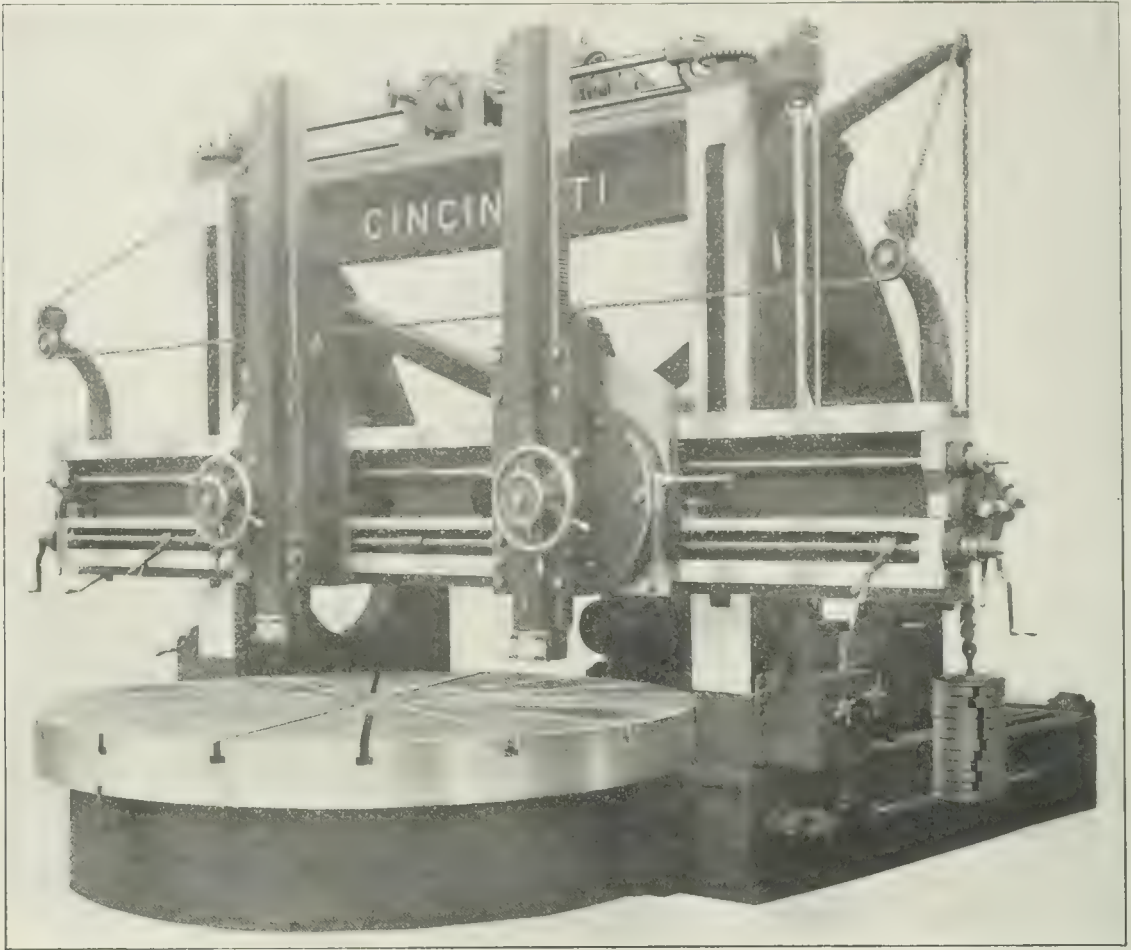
Front View of a New Boring Mill Built by the Cincinnati Planer Company, Oakley, Ohio.
